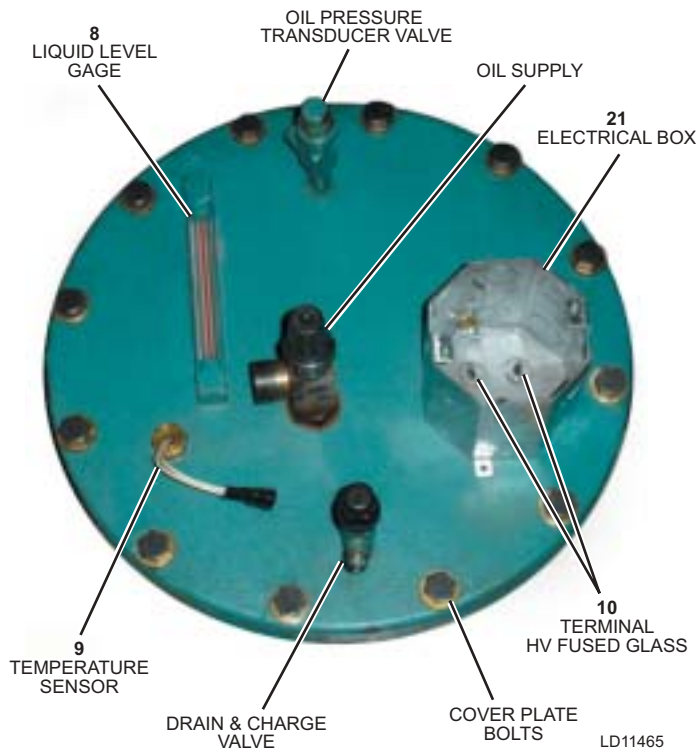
OIL PUMP HOUSING COVER PLATE
